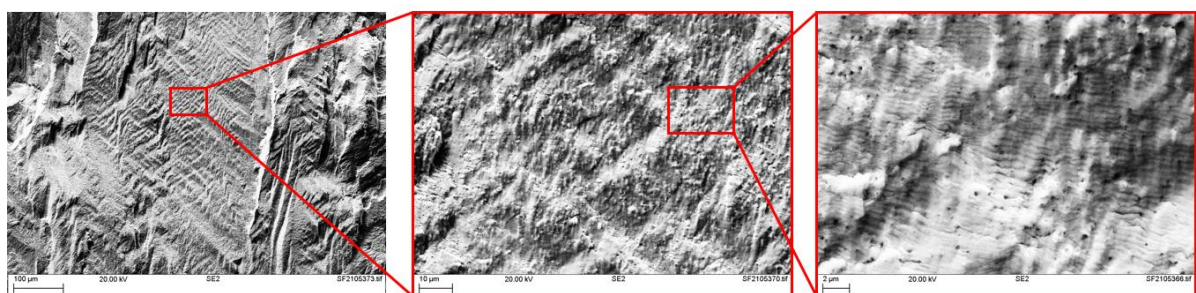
SEM view of specimen N°1 fracture surface, magnified within 316L bottom layer
